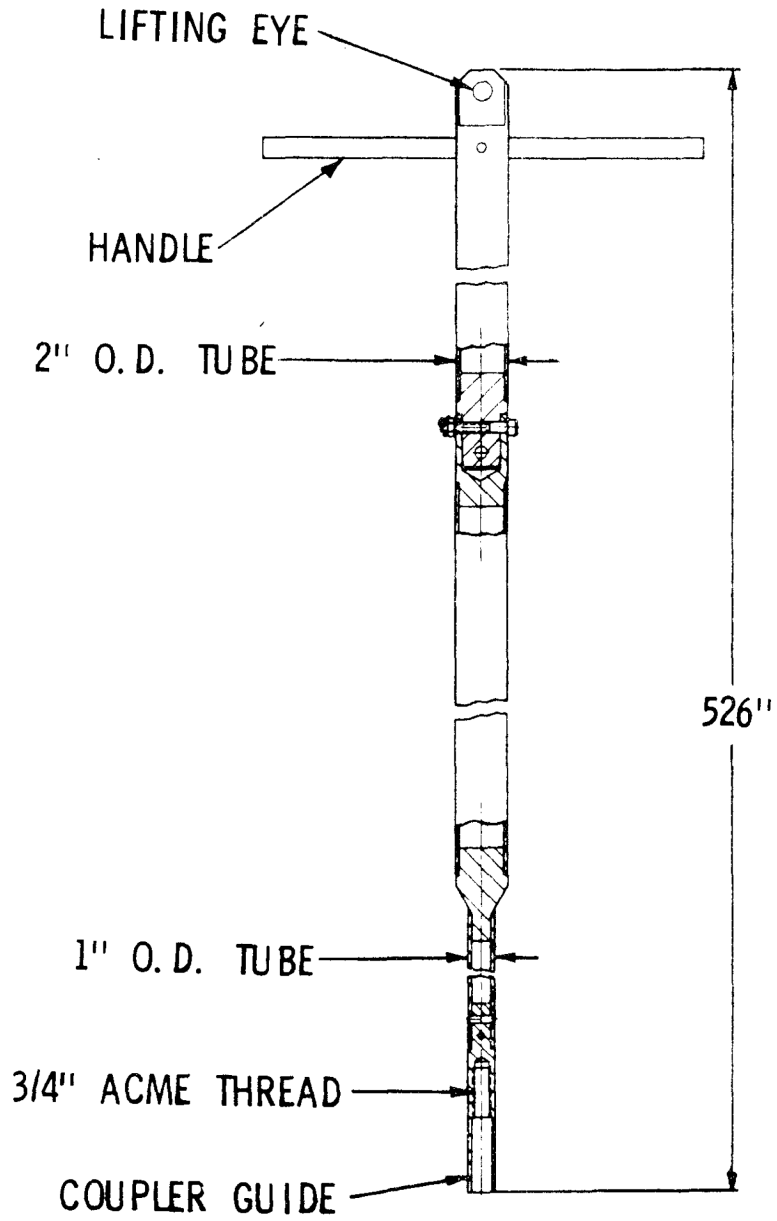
SPENT FUEL POOL PLATFORM CRANE
